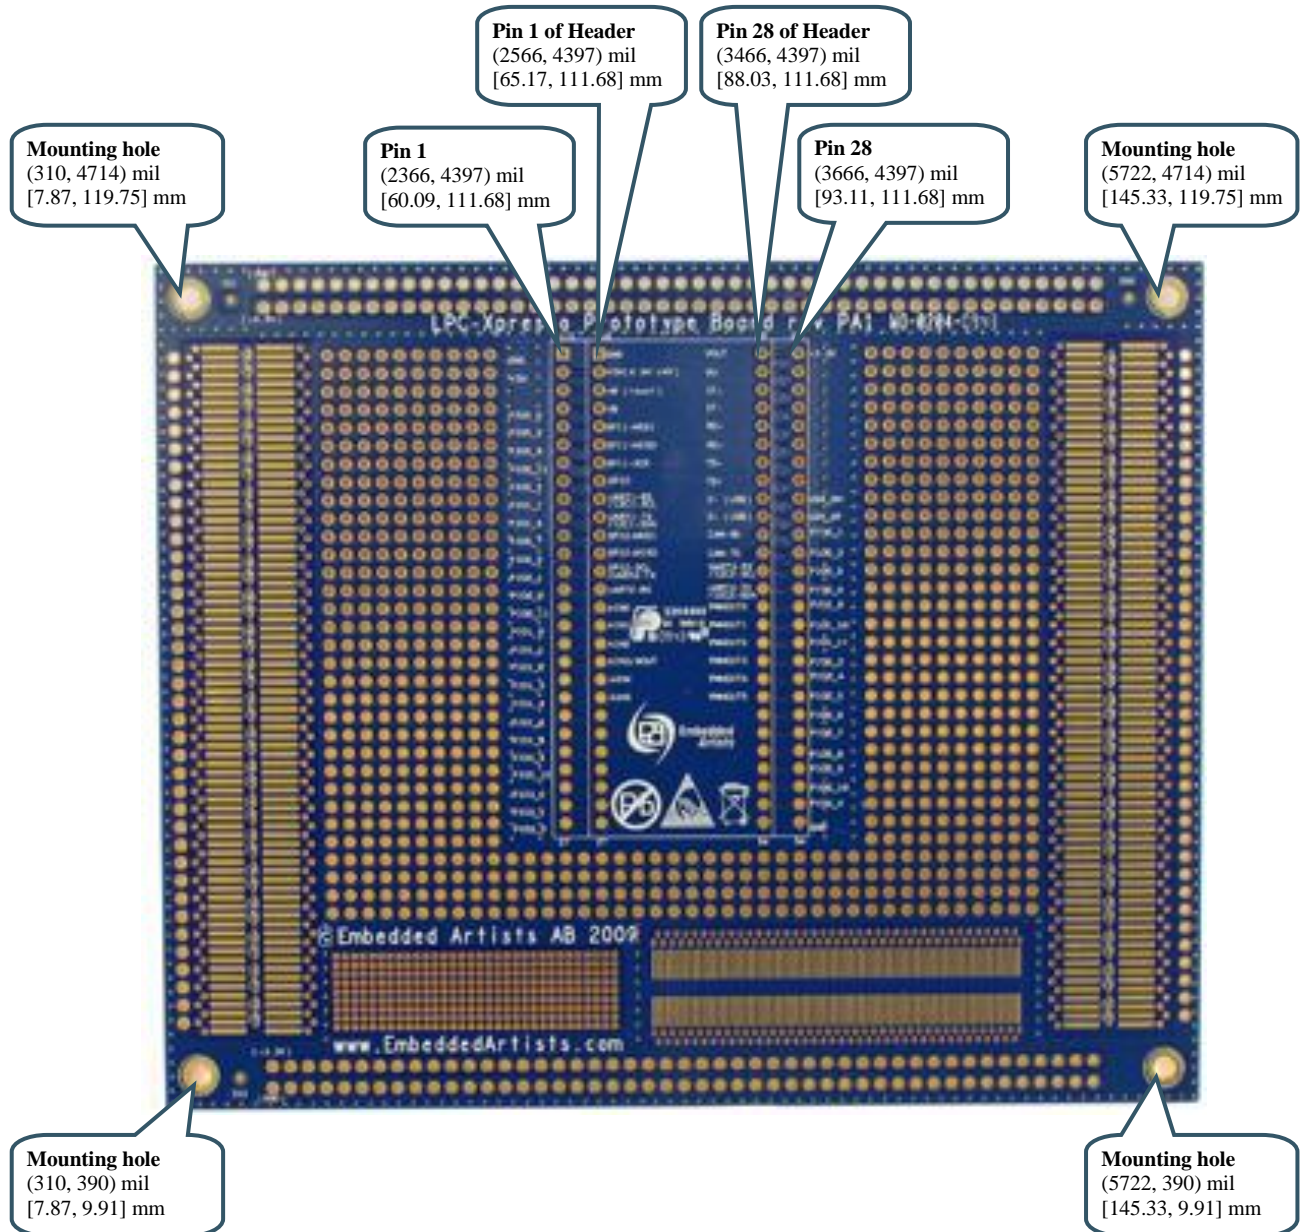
LPCXpresso Prototype Board Mechanical Dimensions
